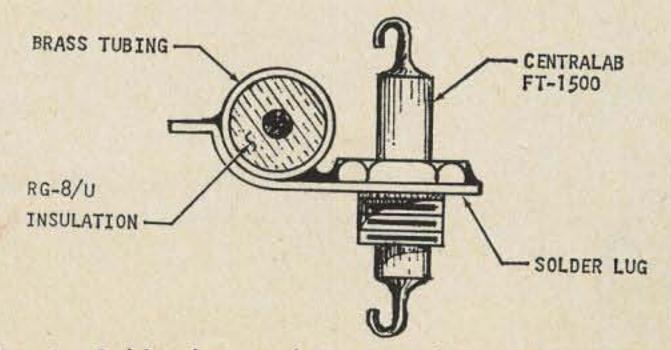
Solder lug is shaped to fit one-quarter way around the brass tubing.
